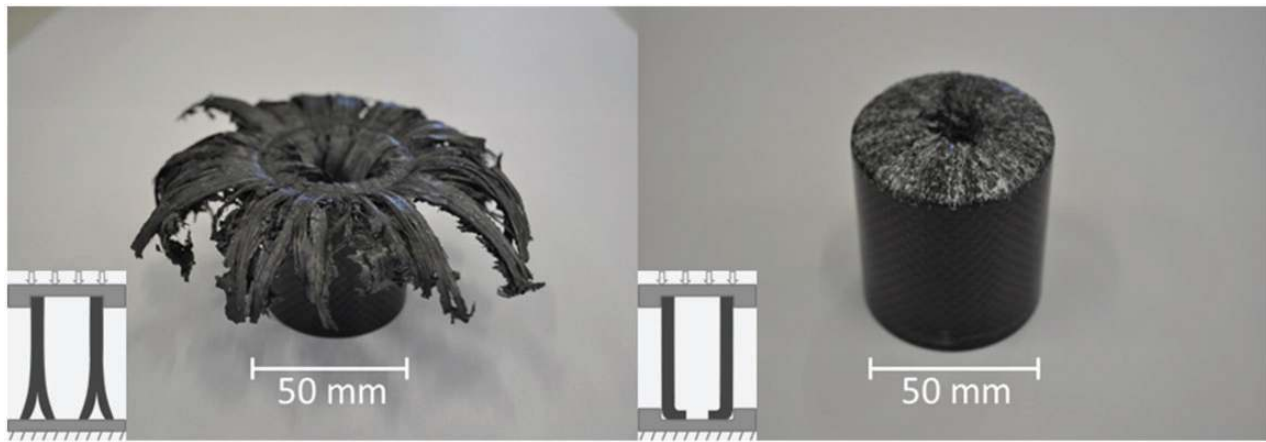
Crushed CFRP tube I showing outer spreading (left) and inner folding (right) based on boundary condition (a) free crushing and (b) inner crushing, respectively.
